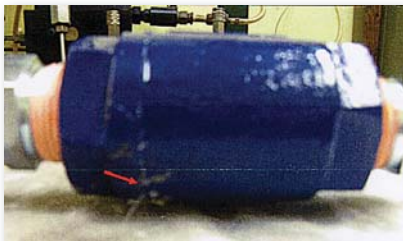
A: Failure mode of Sample# 13-06-C0161-1, Body fractured at 6,753 psi.
